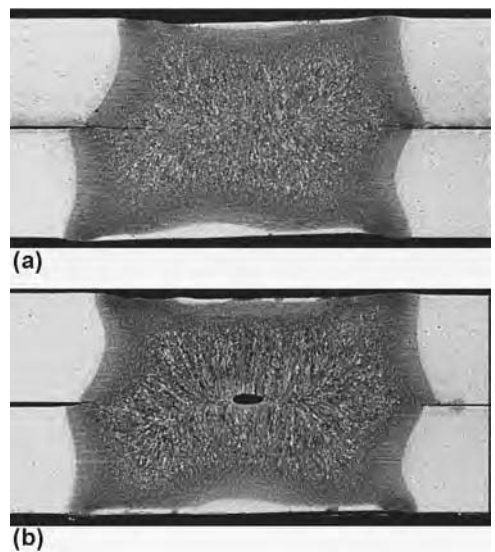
Cross sections of welds made using machines with different frictions on a 1.7 mm (0.067 in.) steel. Source: Ref 8
